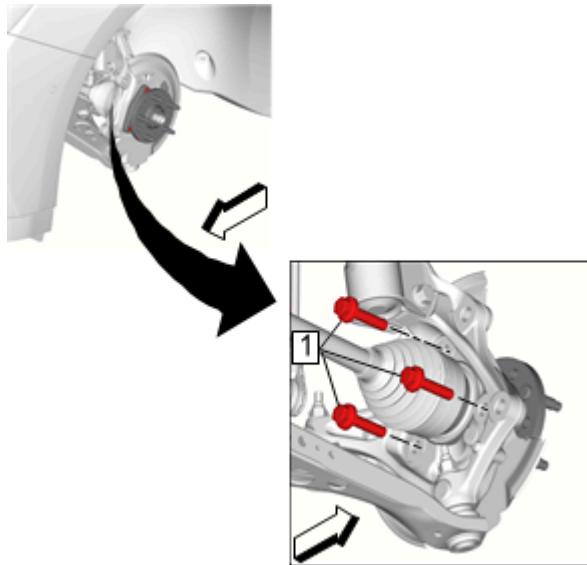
Front Wheel Bearing and Hub Assembly Bolts
